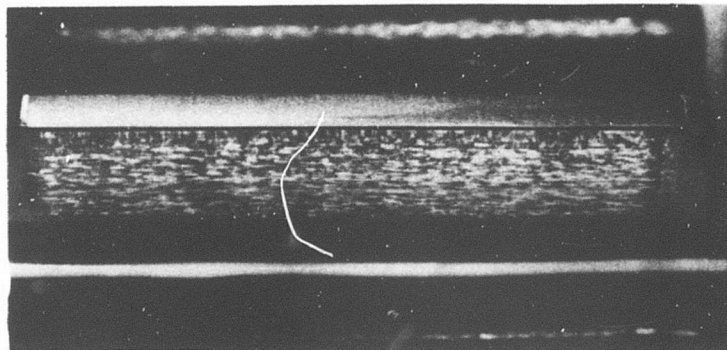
Upper Planetary Gear Following Input Pinion Failure at 90% Torque, $300^{\circ}\pm 5^{\circ}\text{F}$ Ring Gear Side.
